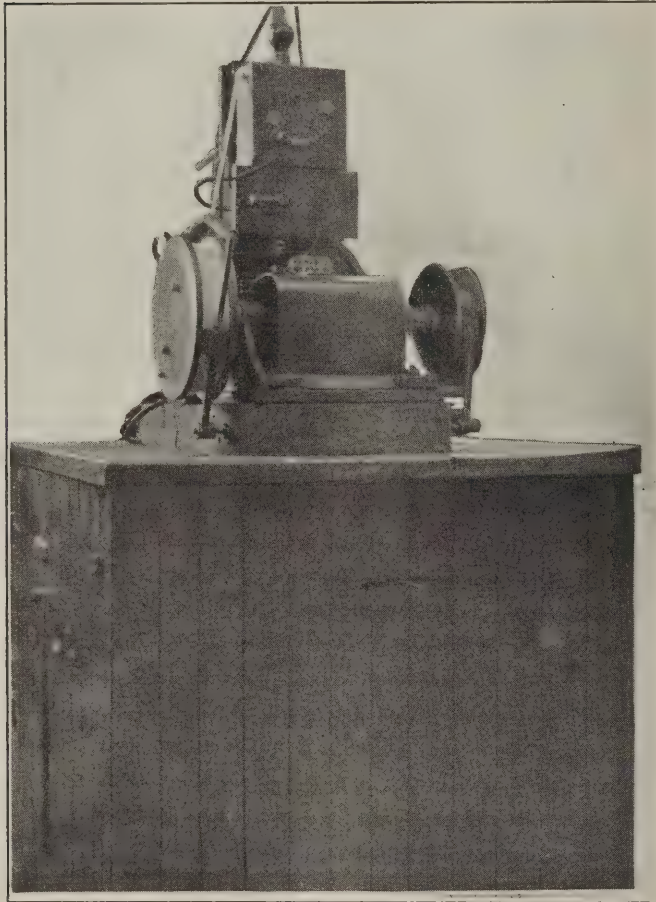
Field Coil Winding Machine. Reels of Magnet Wire Are Mounted Inside the Base and Are Completely Covered
